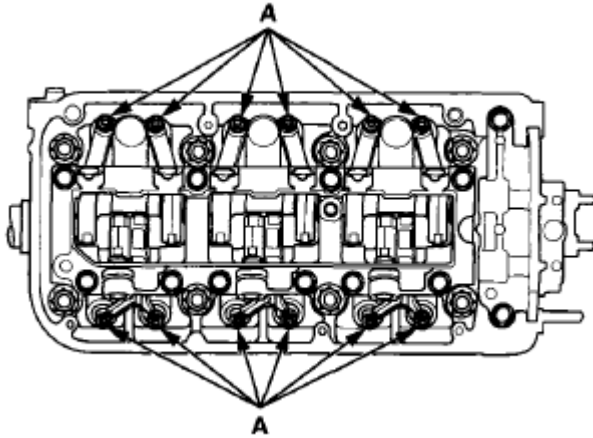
Identifying Locknuts And Adjusting Screws (Rear)
